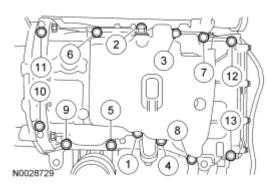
Identifying Tightening Sequence Of Oil Pan Bolts Courtesy of FORD MOTOR CO.
